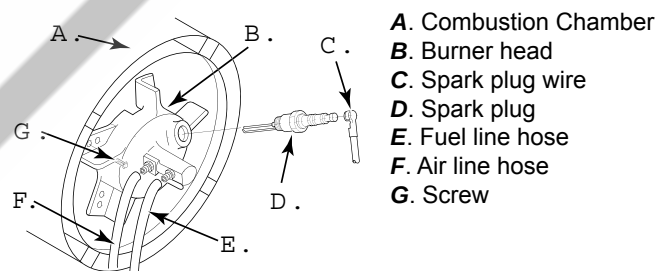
Removing burner head, 70.000, 100.000, 150.000 Btu/Hr models.
